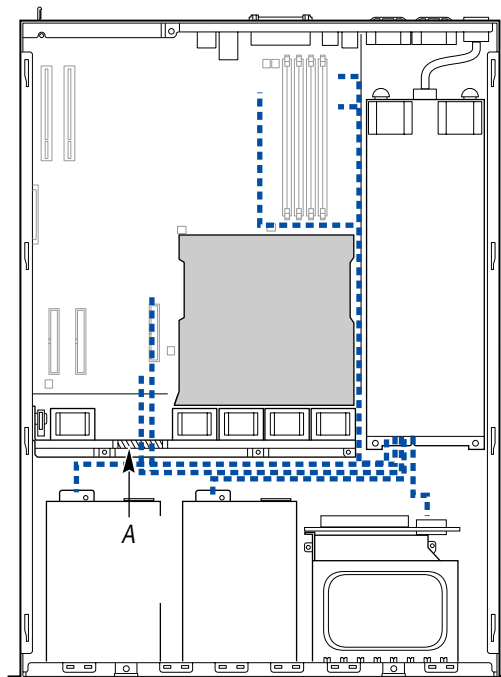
Routing for Chassis Intrusion and Front Panel Cables
